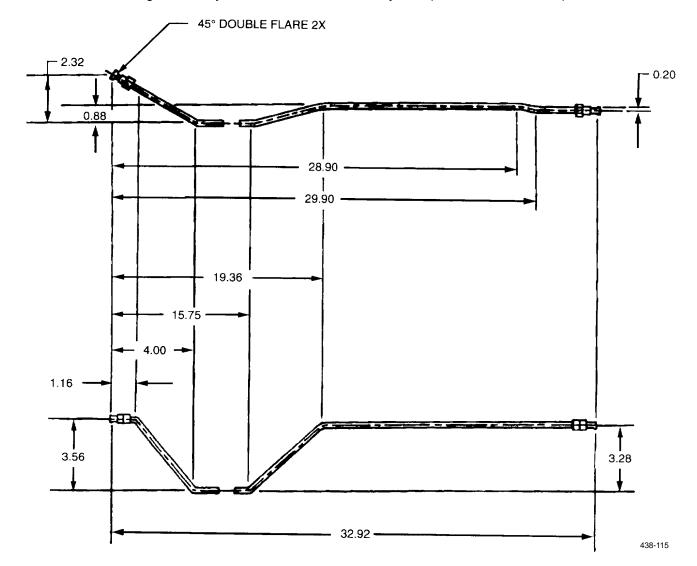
Hydraulic Brake Tube Assembly, Left (M101A3 and M116A3)
